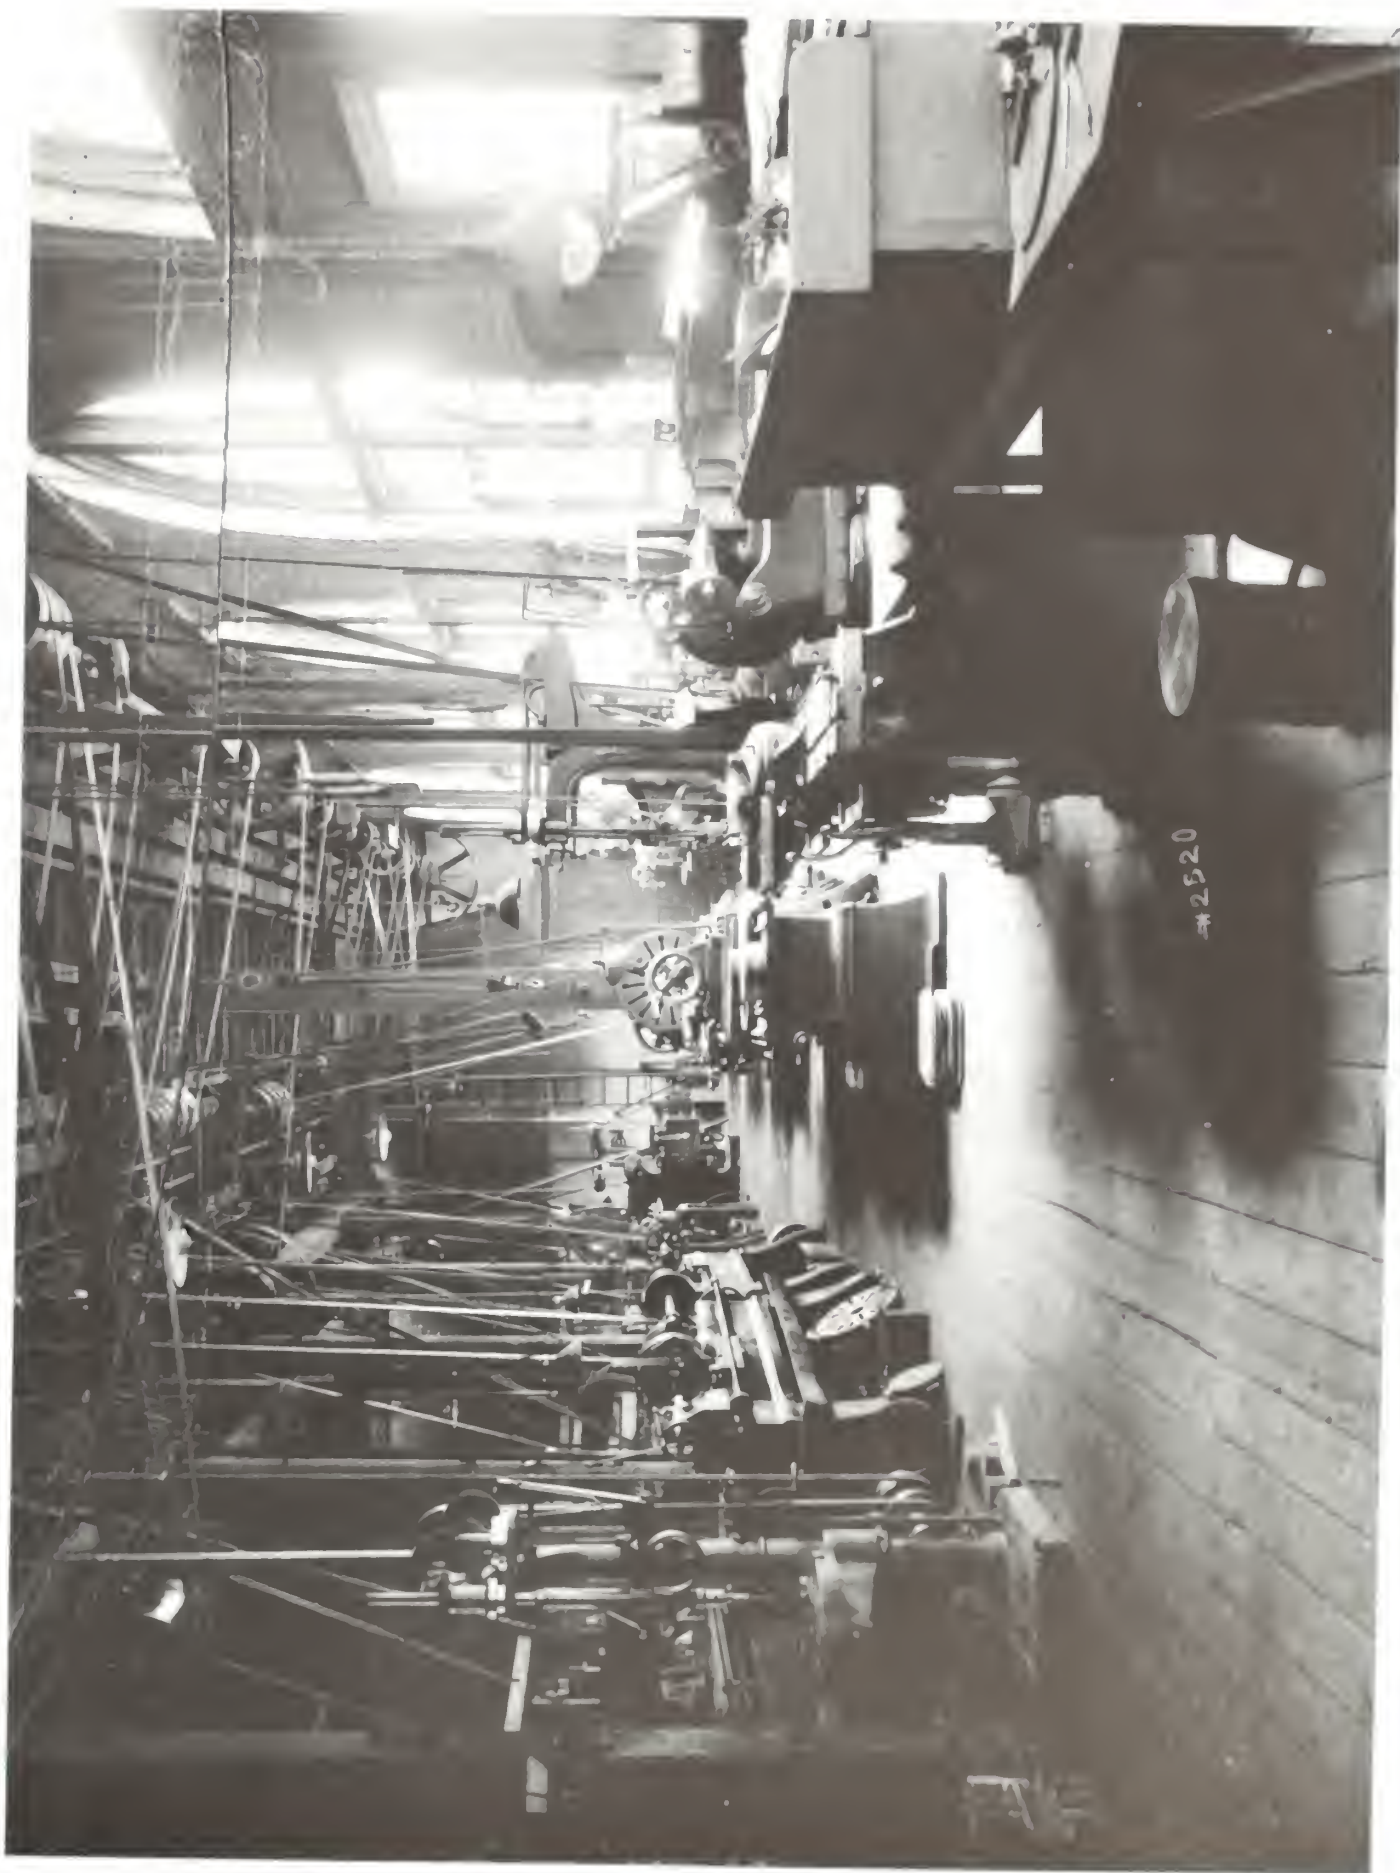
Heavy machine shop, Building 5, north aisle, looking west,
